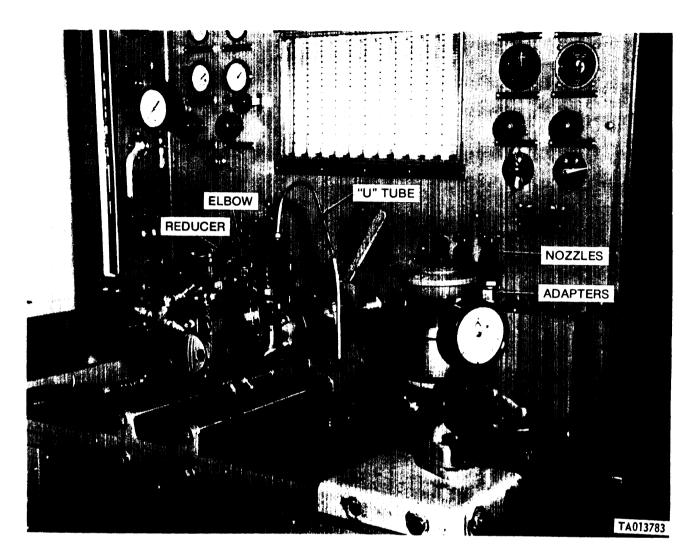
Fuel injection pump on test stand showing nozzle tester hook-up.
